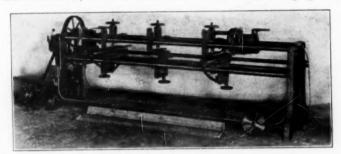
Automatic Horizontal-Feed Trim and Dado Machine
